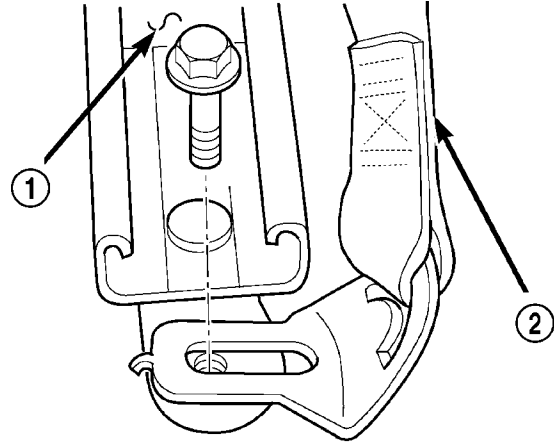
FRONT SEAT CENTER OCCUPIED BELT BUCKLE - REMOVE/INSTALL
